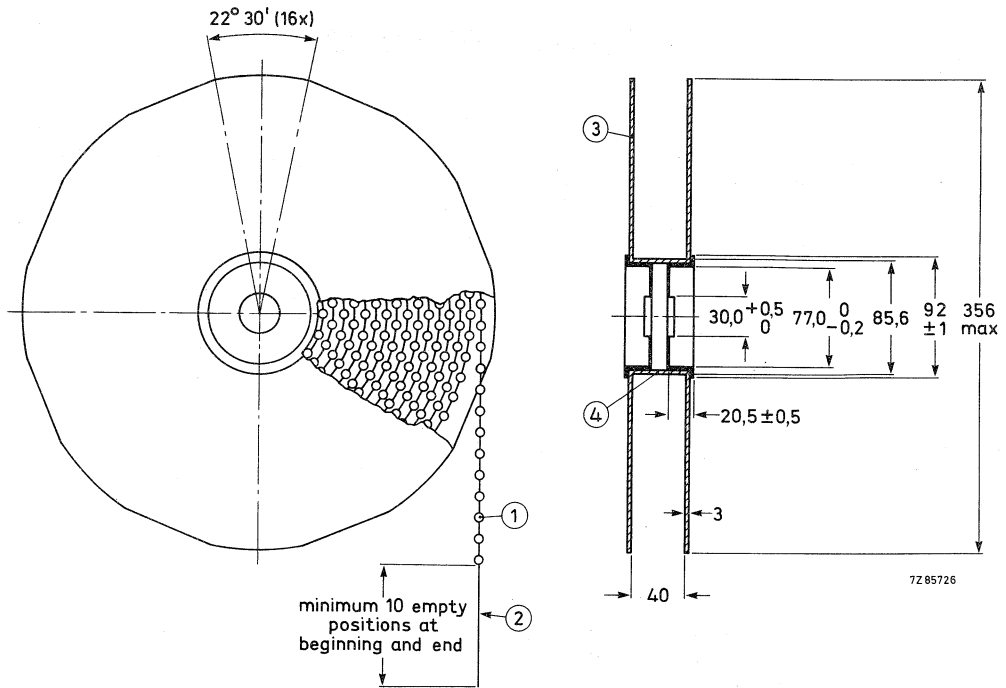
Reel dimensions (mm) for radial-taped diodes.
